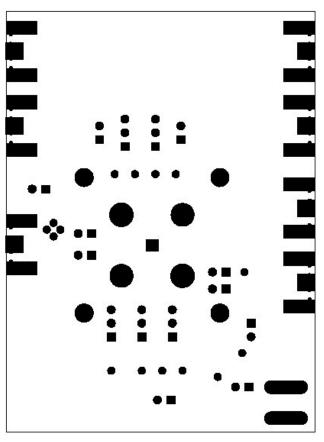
MAX3740A EV Kit PC Board Layout - Solder Side
